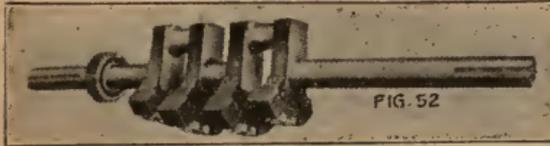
Counterbalanced crankshaft on two-cylinder vertical engine.
